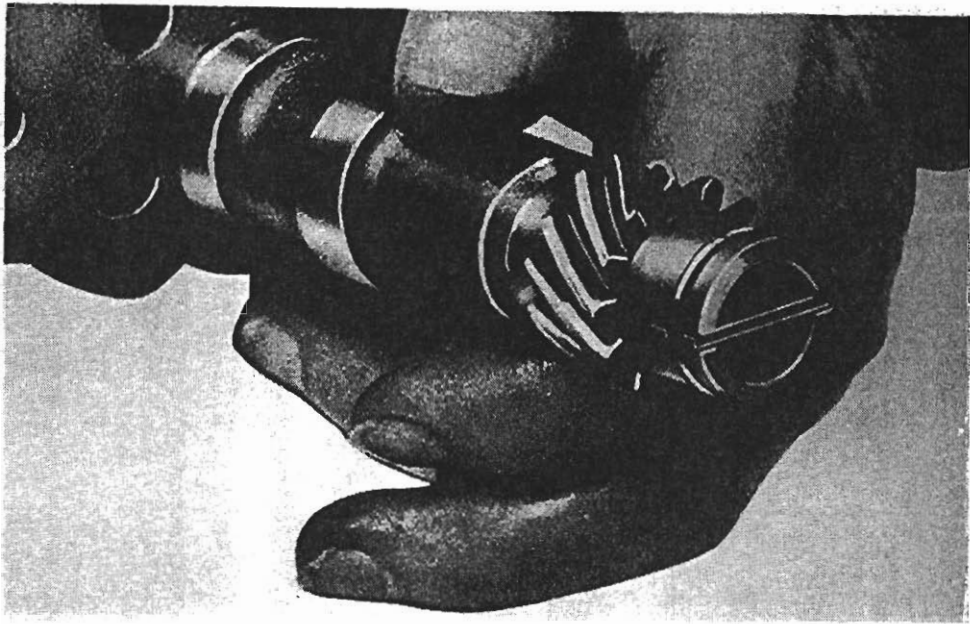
Showing Position of Drive Gear Prior to Installing Oil Pump on Six Cylinder Engine. Note Punch Mark.
